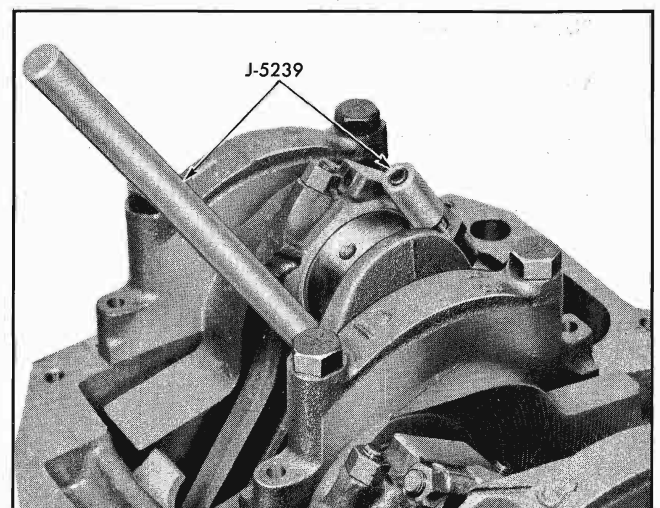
Set J-5239 Positioned for Removal of Connecting Rod Bearing Shell
